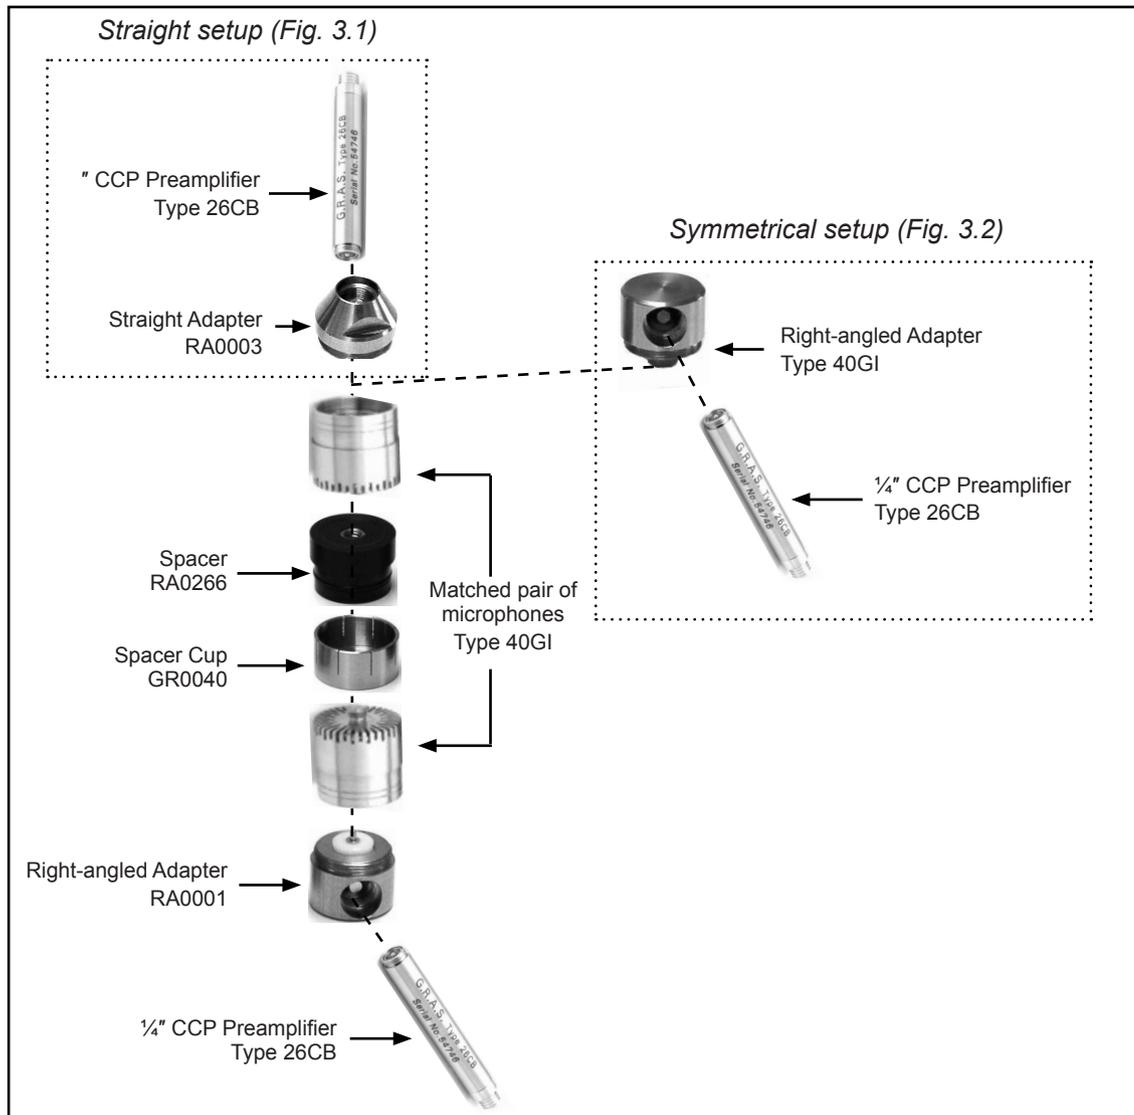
Exploded view of probe assembly for both straight and symmetrical setup
